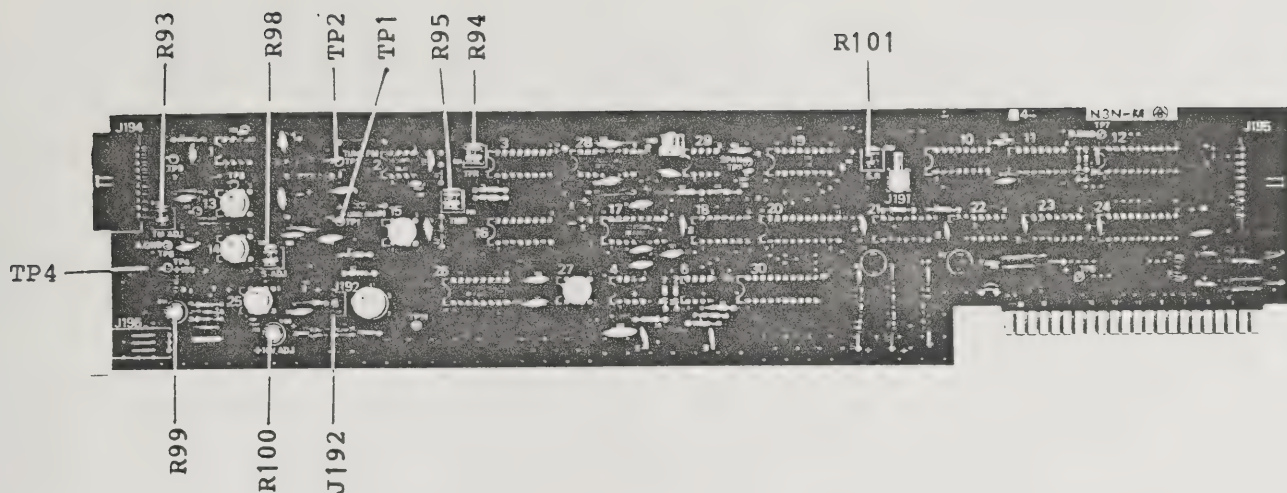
Locations of adjustments on the YIG Oscillator I/O board (BGN-010219)
